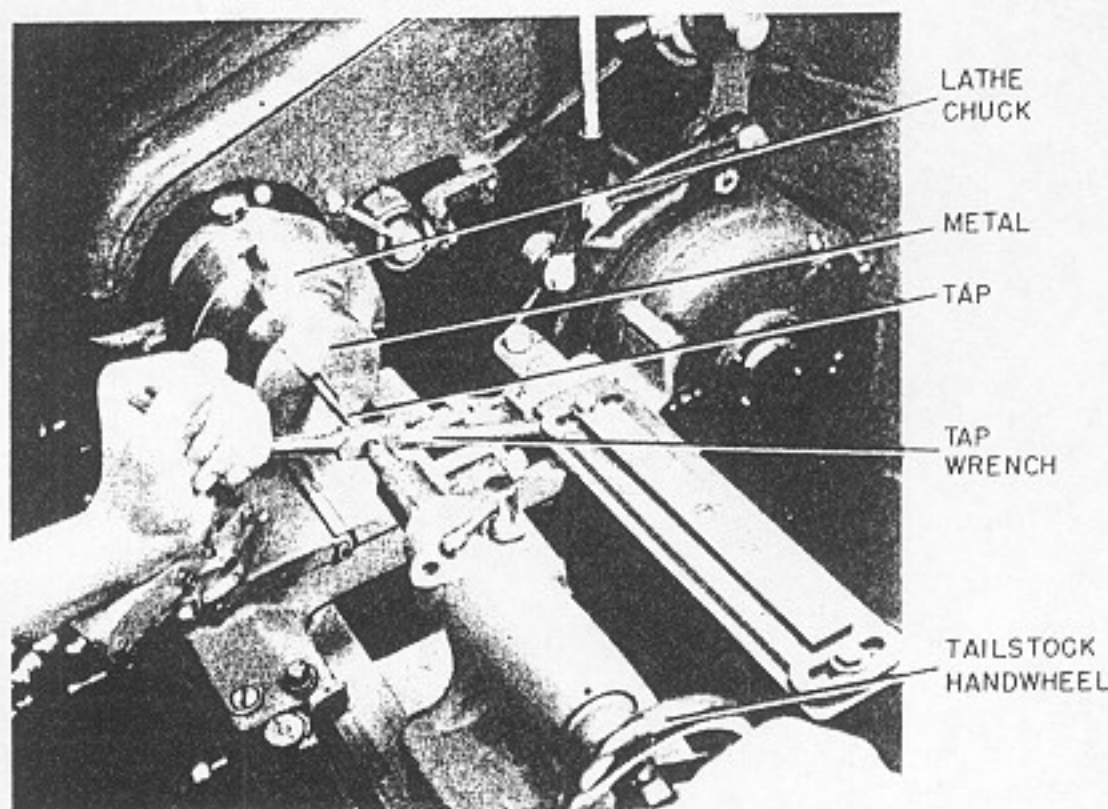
Since the tap is supported by the dead center, threads square with the surface of the metal are cut.
